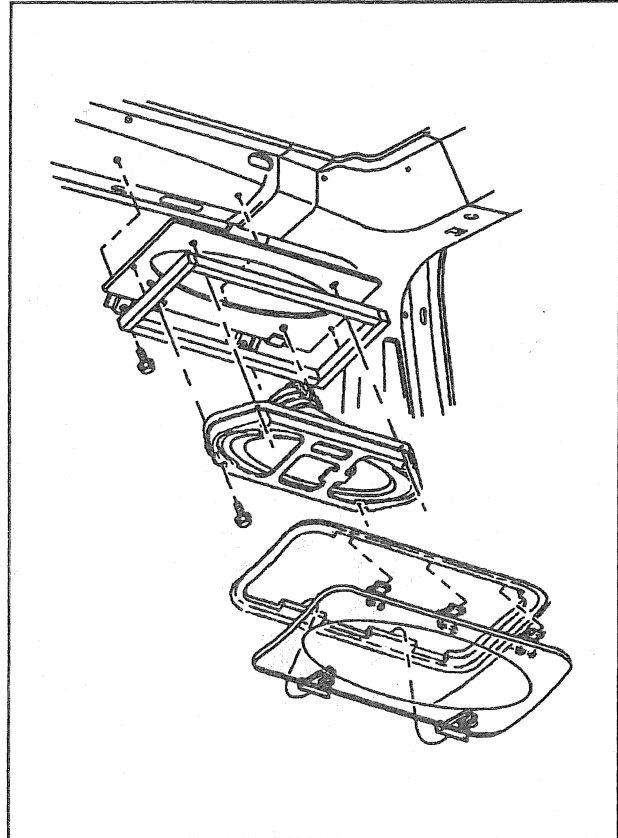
Rear Overhead Speaker Assembly (Suburban and Utility Models)
